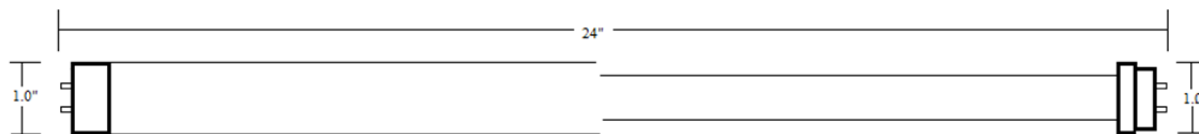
M16377/86-002 lamp dimensions (inches).
